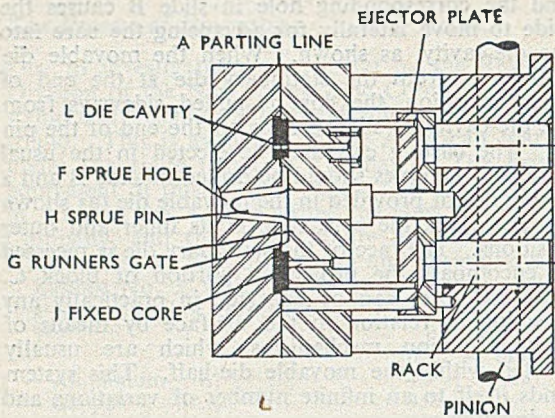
Section through a Die-casting Machine Die Assembly Ready for Casting.
